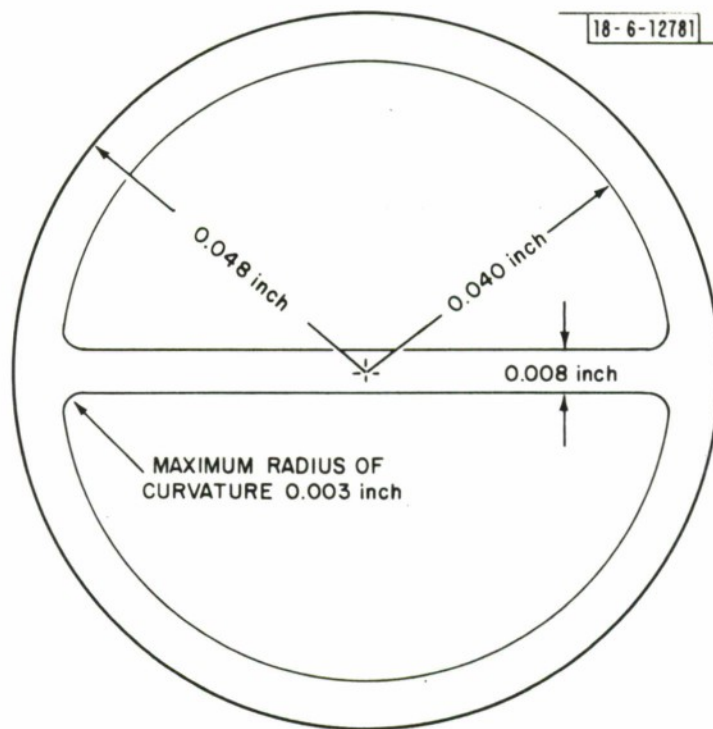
Cross-sectional dimensions for bifurcated tube specification.
